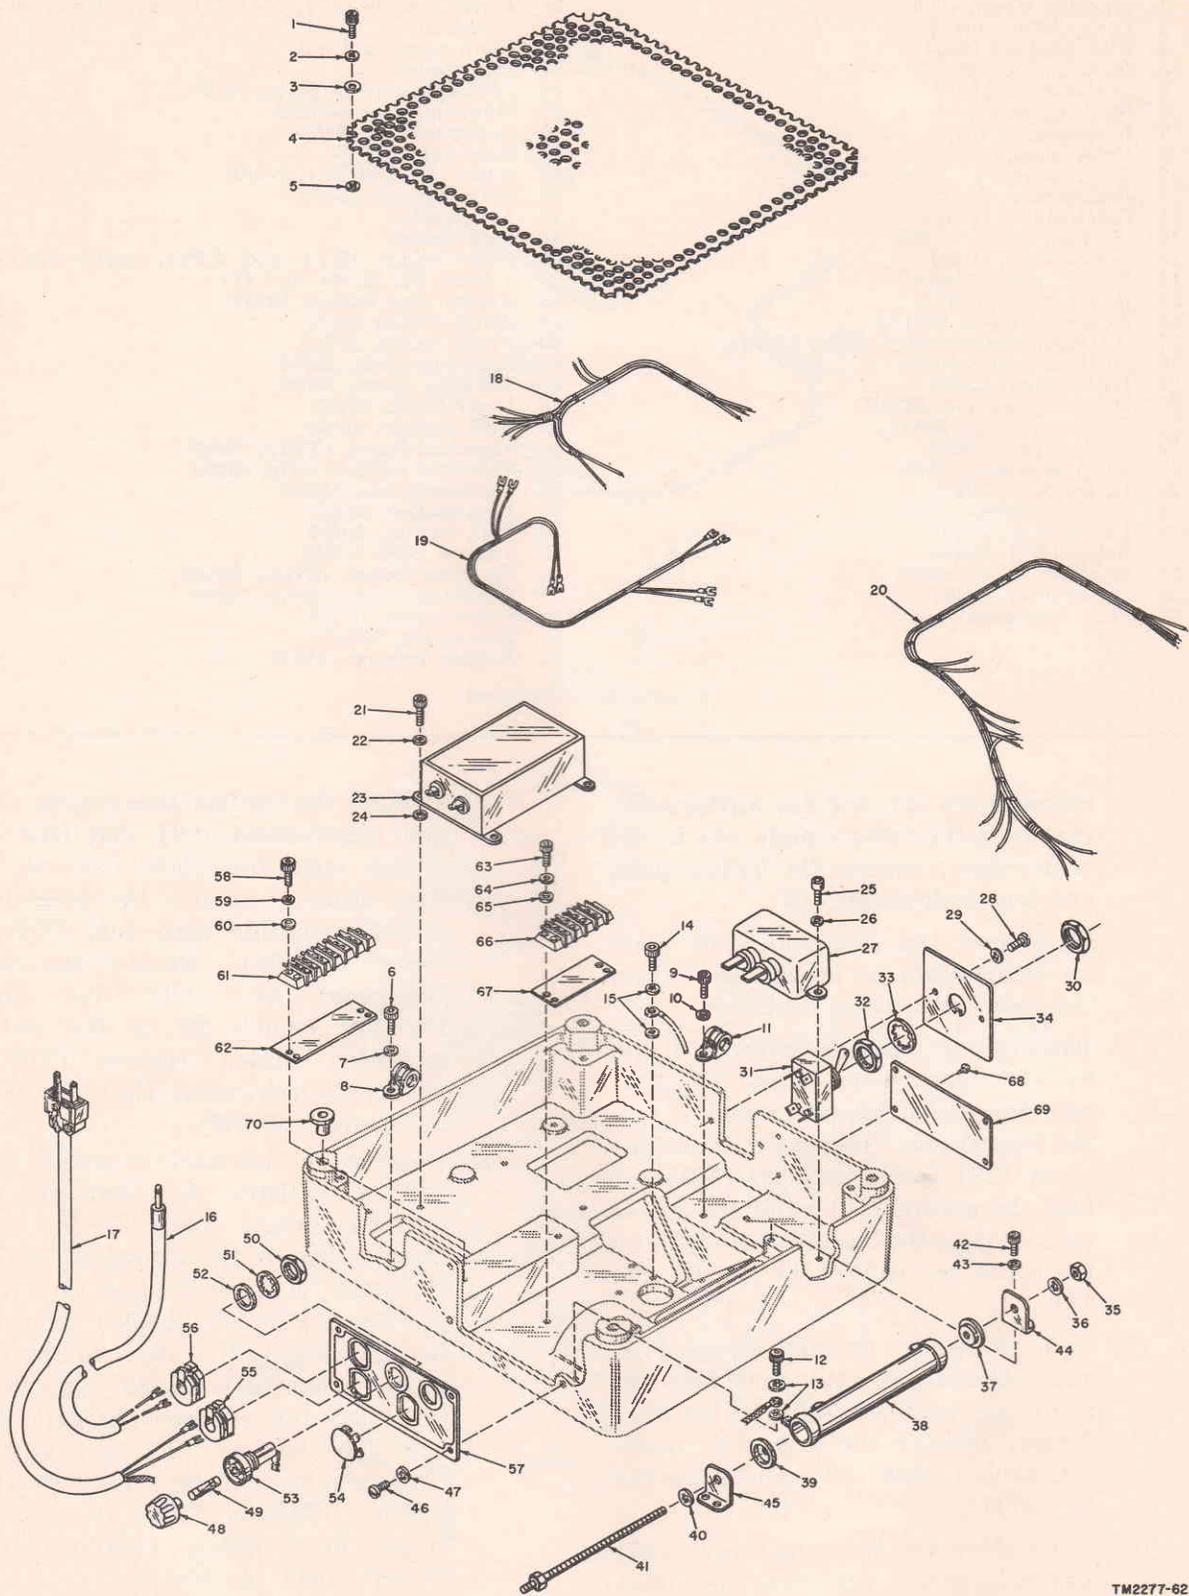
Base electrical components (TT-122A/FG), exploded view.
